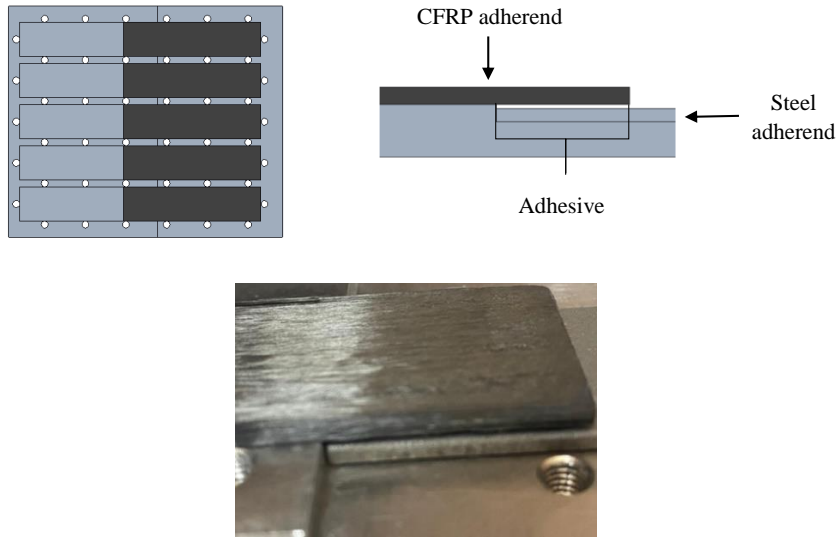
Placement of SLJ adherends and adhesive material on the fabricated mold.
